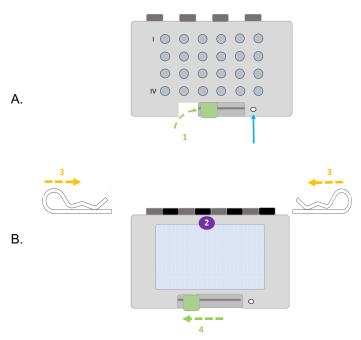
Assembly of Mailer. (A) View of bottom-half illustrating steps to install slide closure. (B) View of top-half illustrating steps to joining top- and bottom-half.
